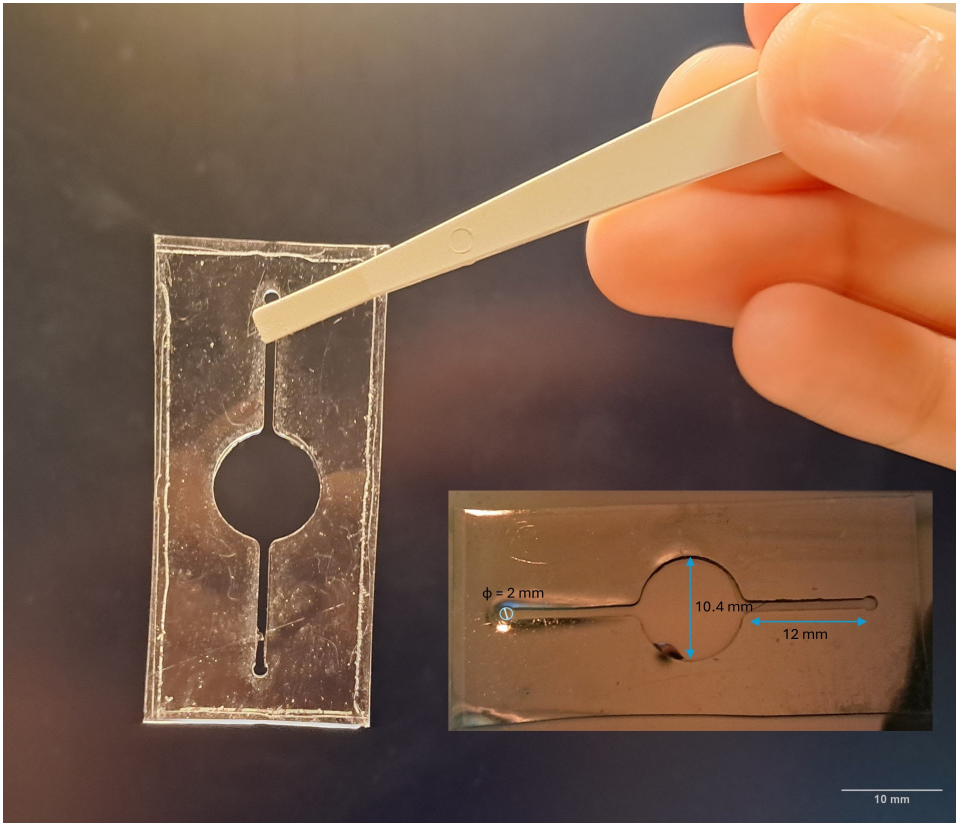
A demolded PDMS layer with the dimension sketch of the design.
